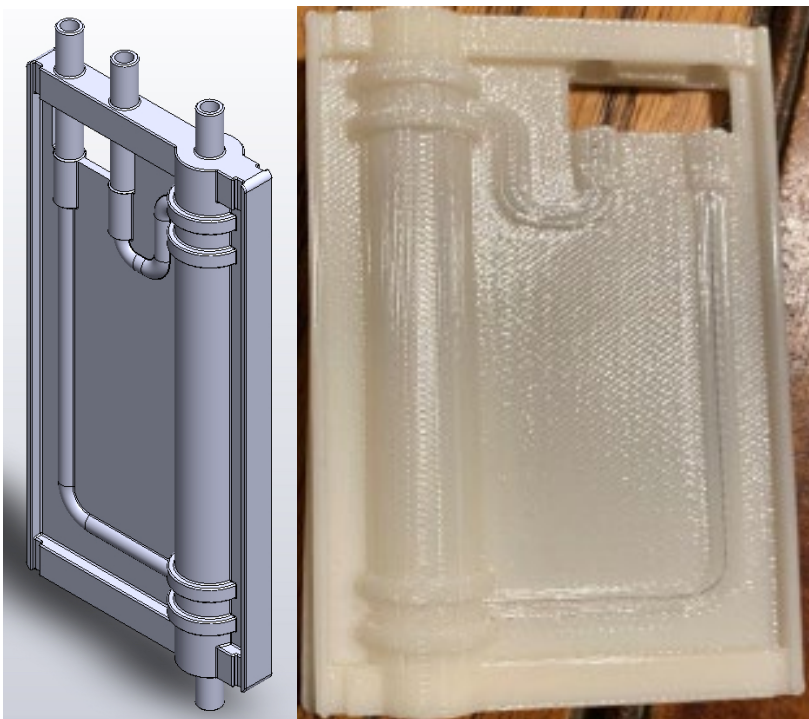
SOLIDWORKS CAD of a fluidized bed and preliminary 3D printed version.
